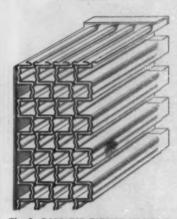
RADIATOR FORMED OF EXPANDED TUBES,
